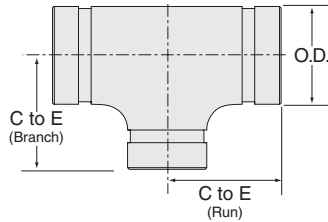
SS STAINLESS STEEL REDUCING TEE
